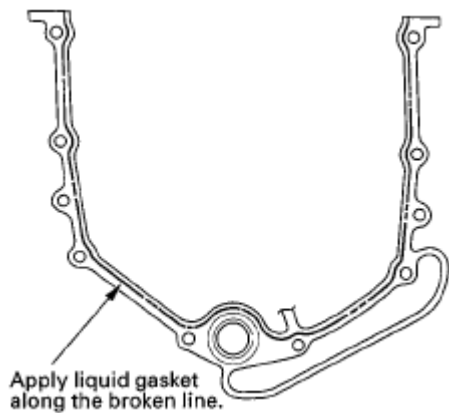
Applying Liquid Gasket To Engine Block Mating Surface
